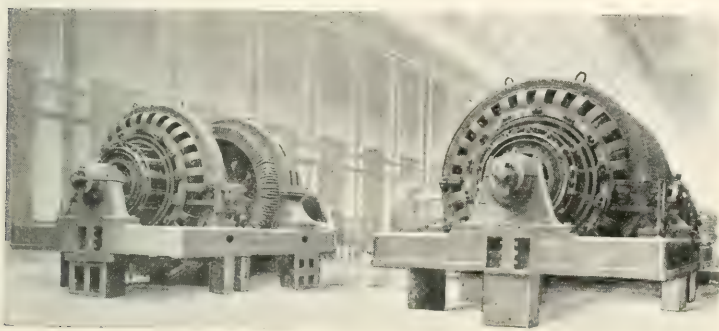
LARGE MOTOR-GENERATOR SETS ON TEST
